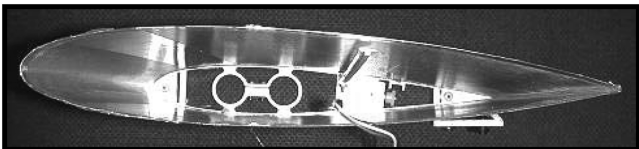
Integrated wing assembly: middle skin (pinion, rack, rib).
